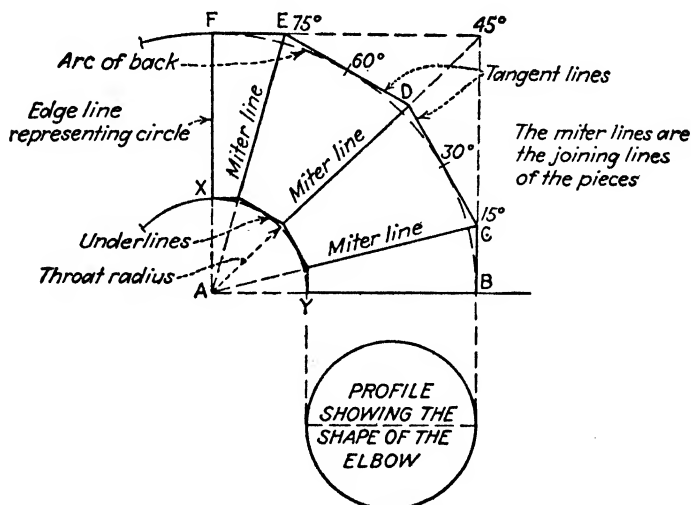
Elevation drawing of four-piece 90-deg. elbow.
